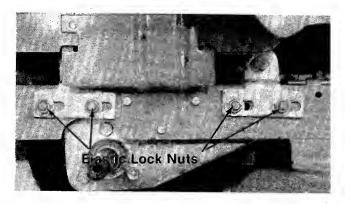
CHAIN ADJUSTMENT REAR WHEELS
